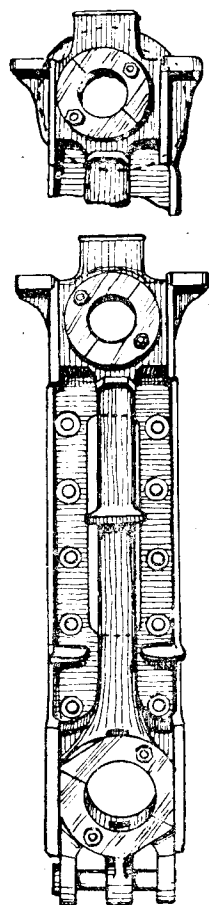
Showing how third shaft bearing and hind axle bearing are linked together to slide in the channel section horncheeks. Scrap drawing shows how R.H. horncheek is enlarged to form the boss on which the second motion spur-wheel revolves
